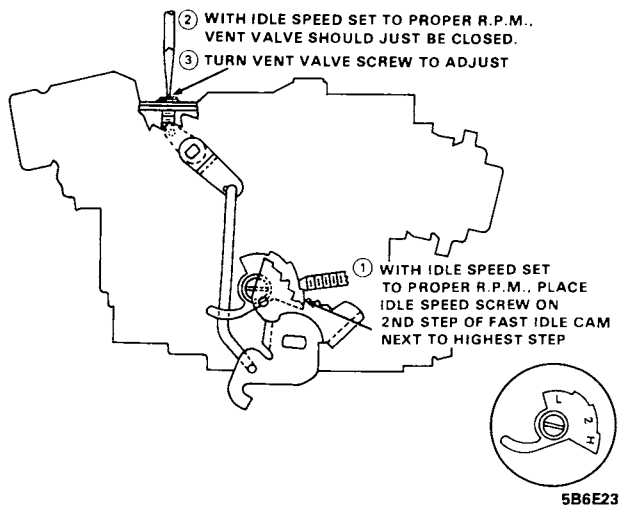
E-23 - Bowl Vent Valve Adjusting Procedure
